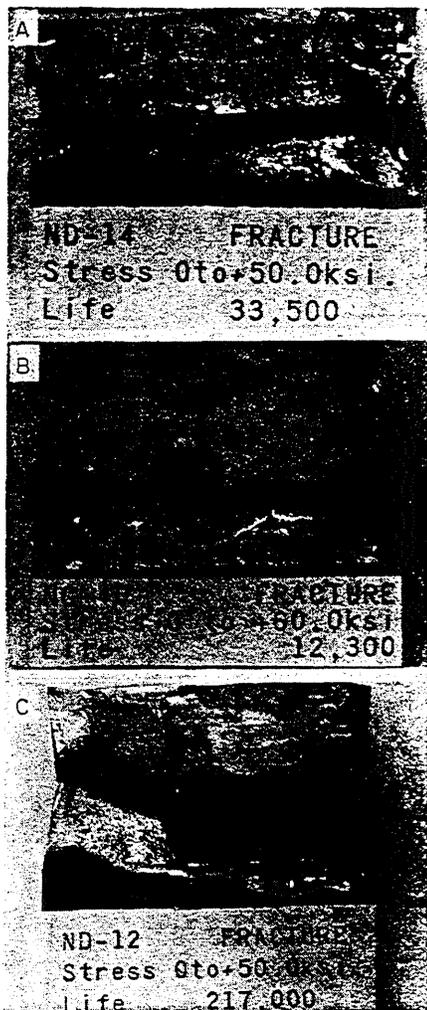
Photographs of fracture surfaces of butt-welded specimens in which fatigue cracking initiated at: A—porosity; B—slag inclusions; C—lack of fusion
